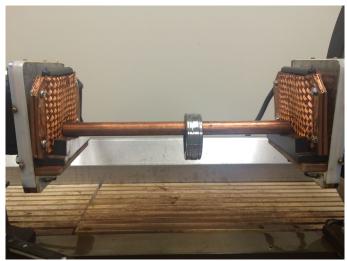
Central Conductor using a wet horizontal Magnaflux machine
